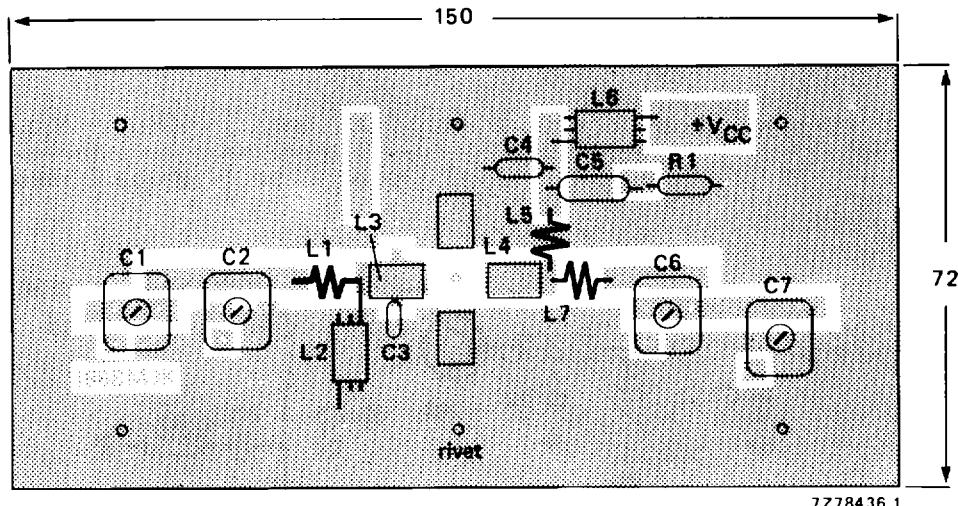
Component layout and printed-circuit board for 175 MHz test circuit.
